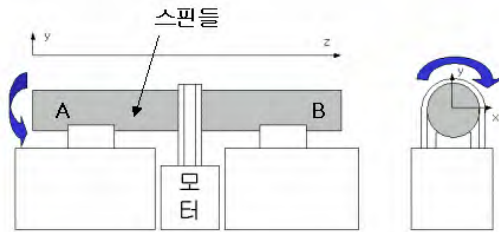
Unbalancing inspectable device of the high-speed spindle
